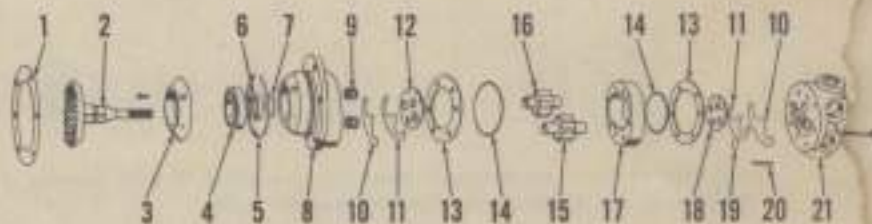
Exploded view of high volume hydraulic pump available on D-15 tractors. Unit is mounted and drives the same as belt pulley unit.
